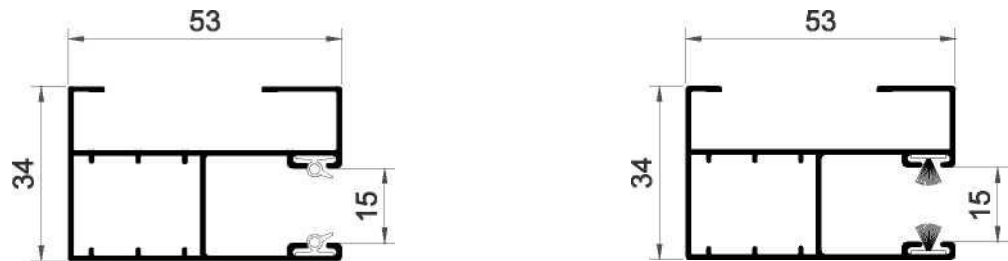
Cross-section side guide (PP53 / ODS), with a bottom slat or brush seal
